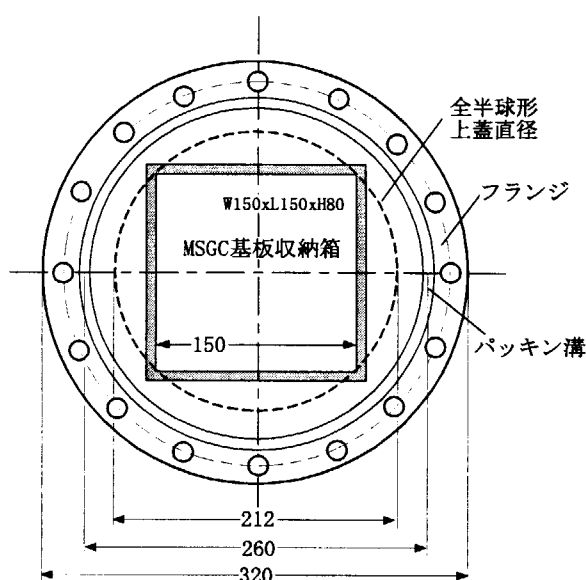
Dimension of a flange welded to a box for installing the MSGC
